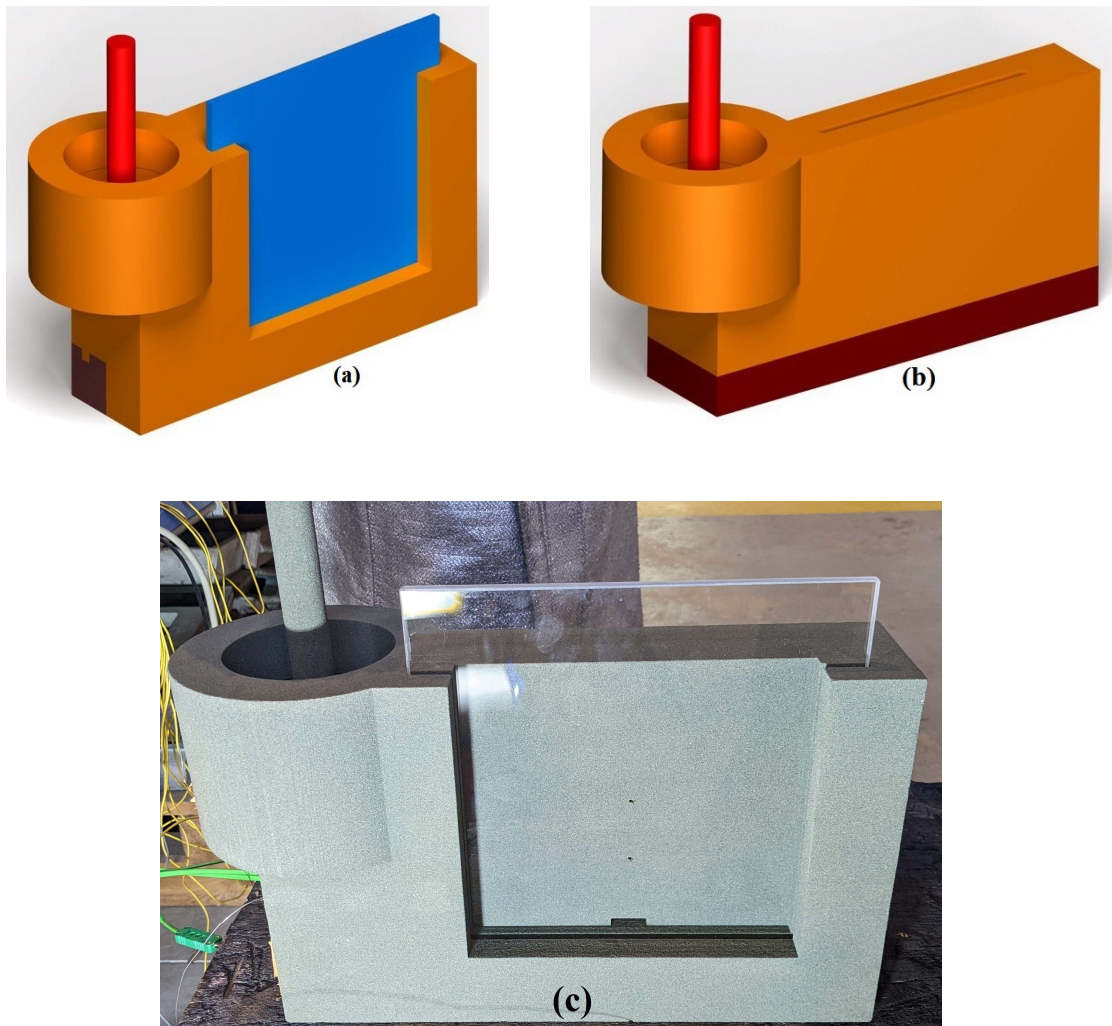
Geometry of mold a) Designing mold with glass by CATIA b) Designing mold without glass by CATIA c) 3D printing resin - bonded sand mold with glass
